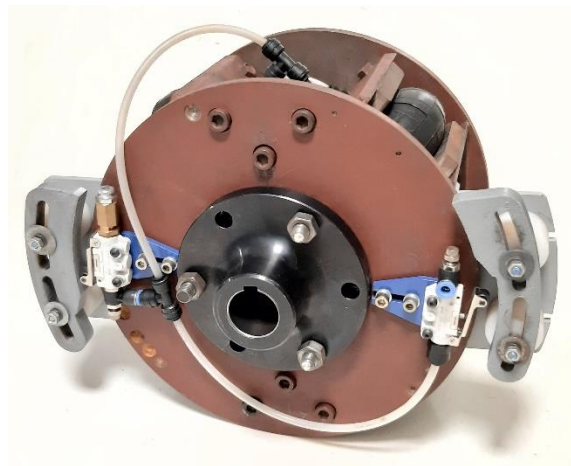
Photo of a manufactured pneumatic coupling prototype
